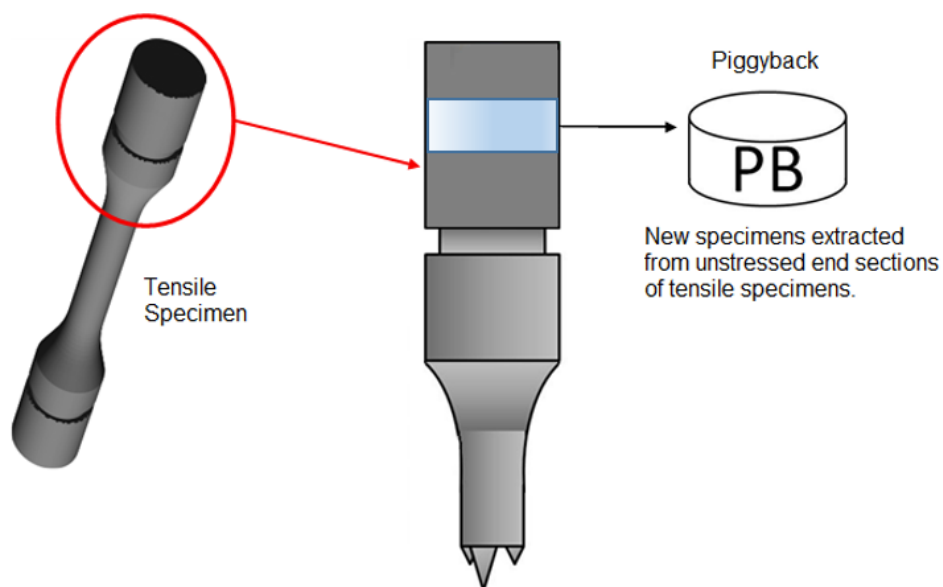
Unstressed specimen remnants from tensile specimens are remachined into AGC geometries.
